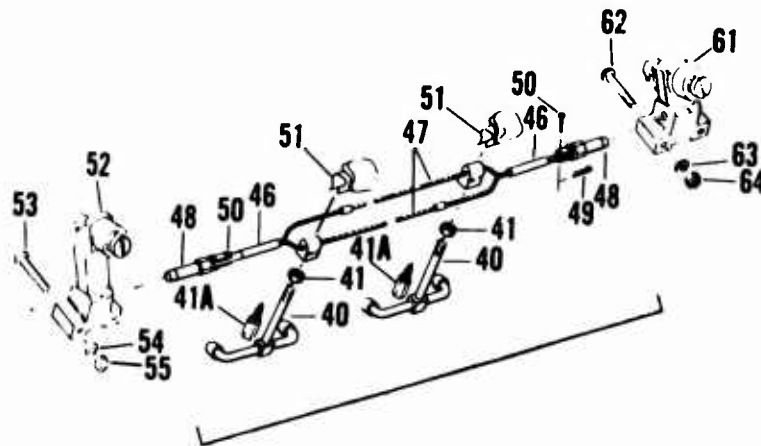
Parts Breakdown, Door Jettison Subassembly.
